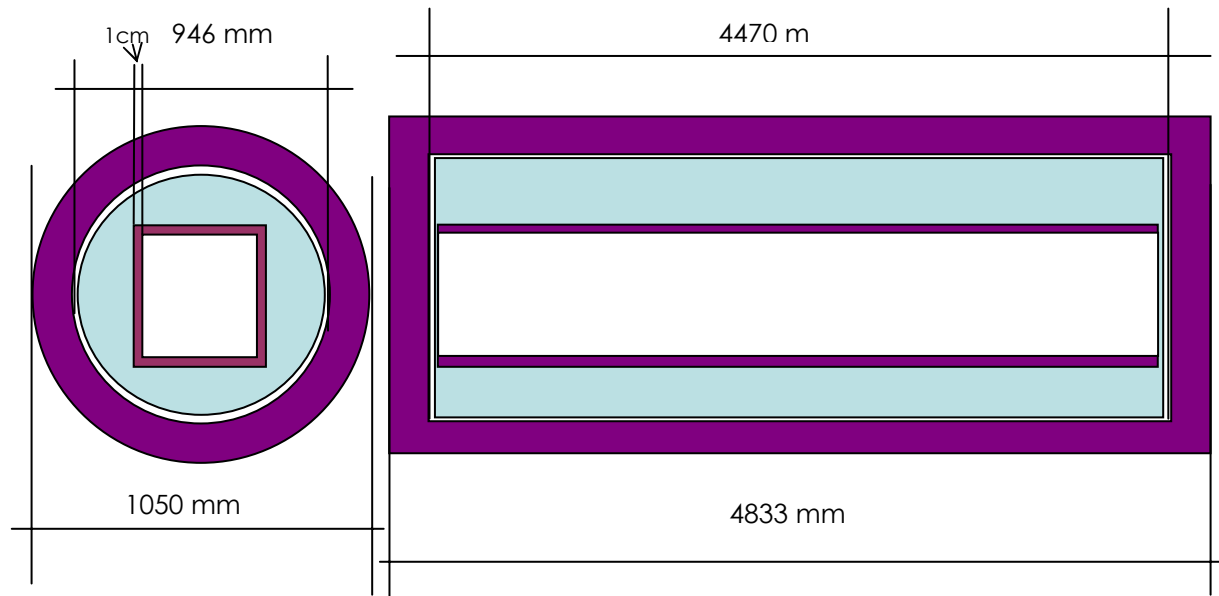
Waste package for 1 MOx spent fuel assembly: Scenario A2: Waste package for 1 MOX spent fuel assembly
